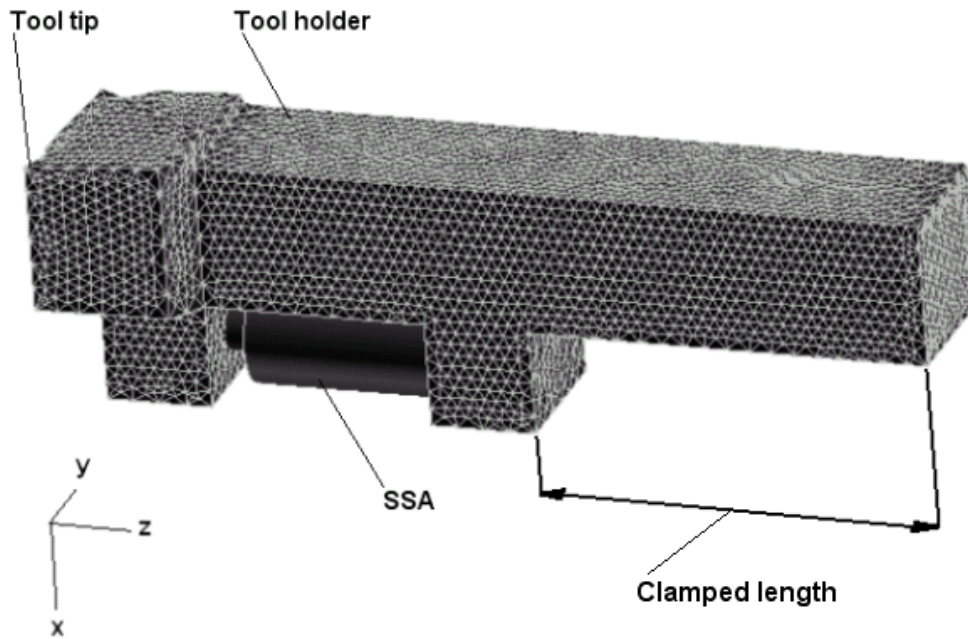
FE model of Mitsubishi DTGNR 2525 M16-type tool holder and SSA
